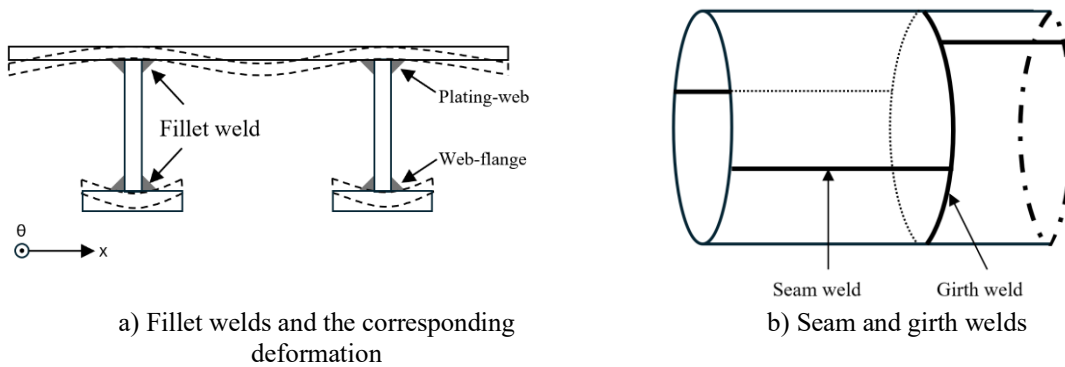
Principal weld configurations in the pressure hull: a) T-joint welds and b) seam and girth welds.
